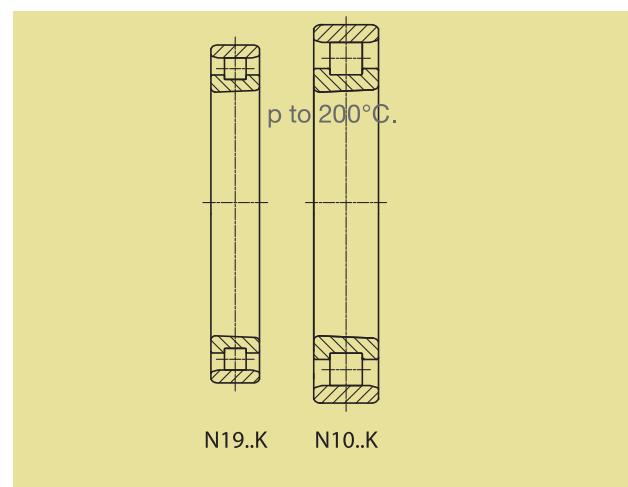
series of single-row high-precision cylindrical roller bearing
